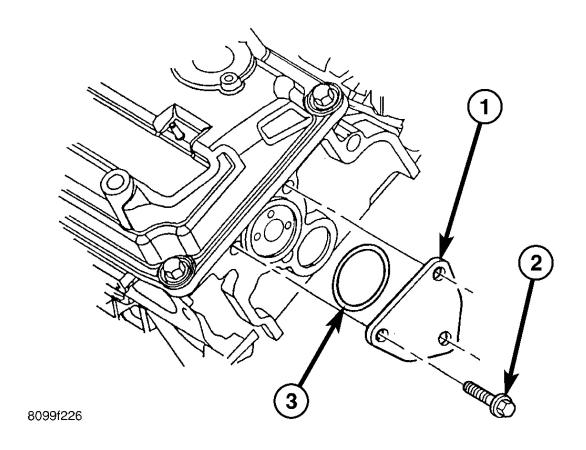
Camshaft Thrust Plate, Bolt & O-Ring Courtesy of CHRYSLER LLC
